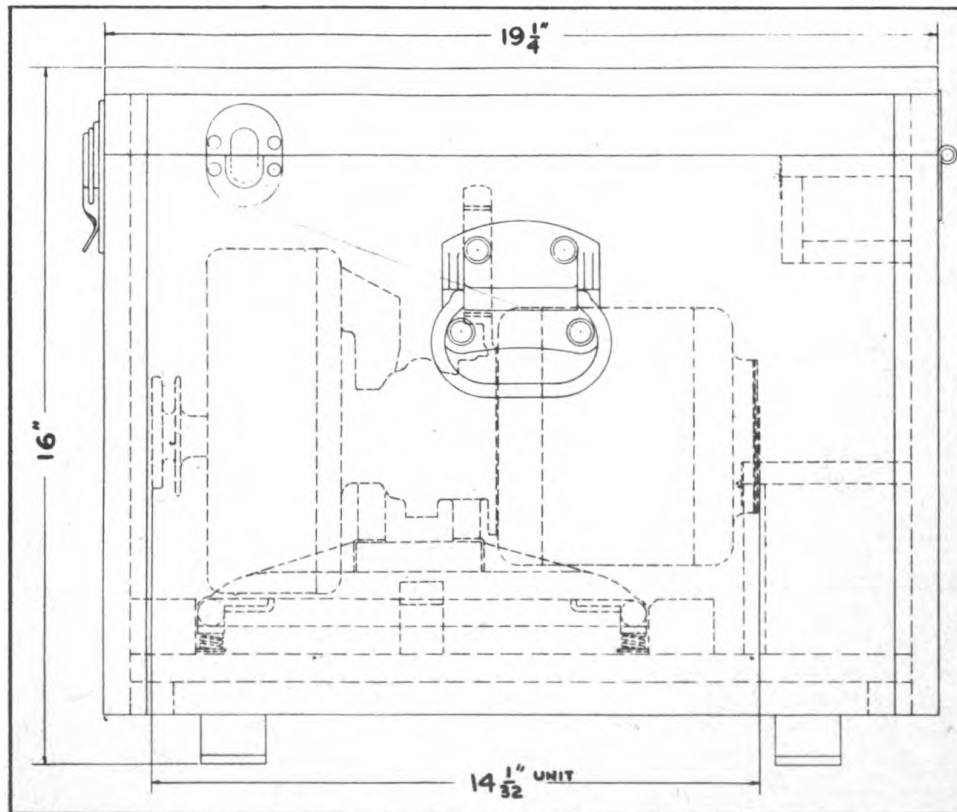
POWER UNIT PE-214-A—OVERALL DIMENSIONS
